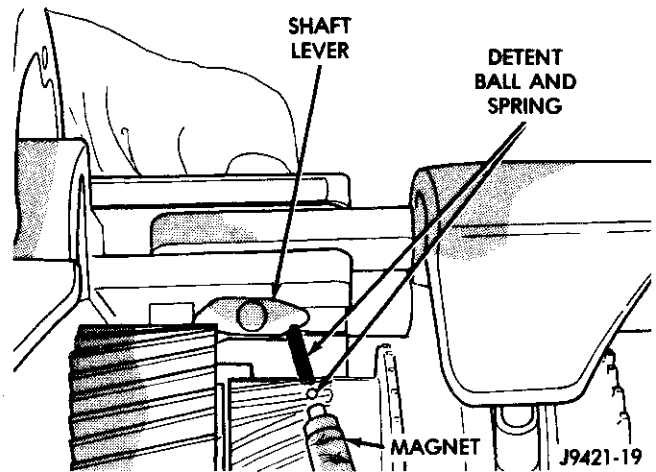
Removing Shift Shaft Lever Detent Ball And Spring
